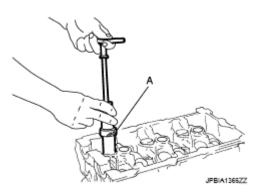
Compressing Valve Spring Using Valve Spring Compressor Courtesy of NISSAN MOTOR CO., U.S.A.
